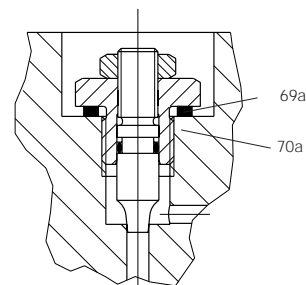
Cushion Needle Valve – Heavy Duty Cartridge
